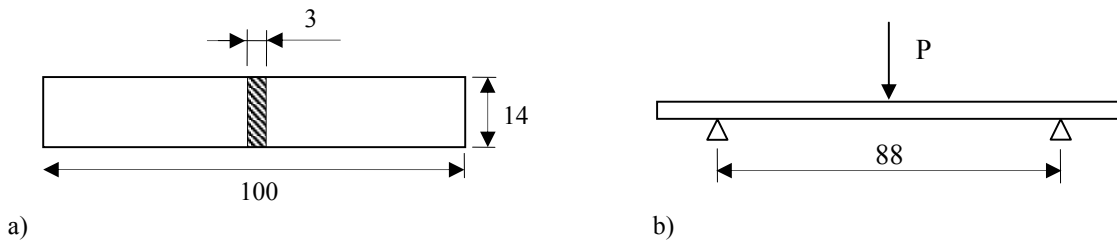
a) Specimens tests (dimensions in mm). b) Three point bending apparatus.
